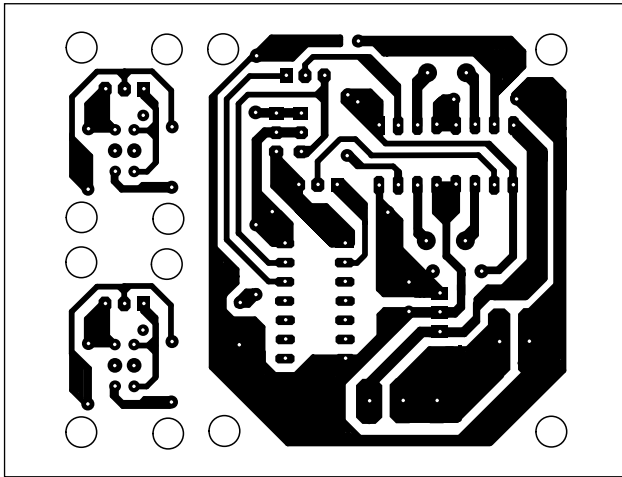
An actual-size, single-side PCB for the line-follower robot
